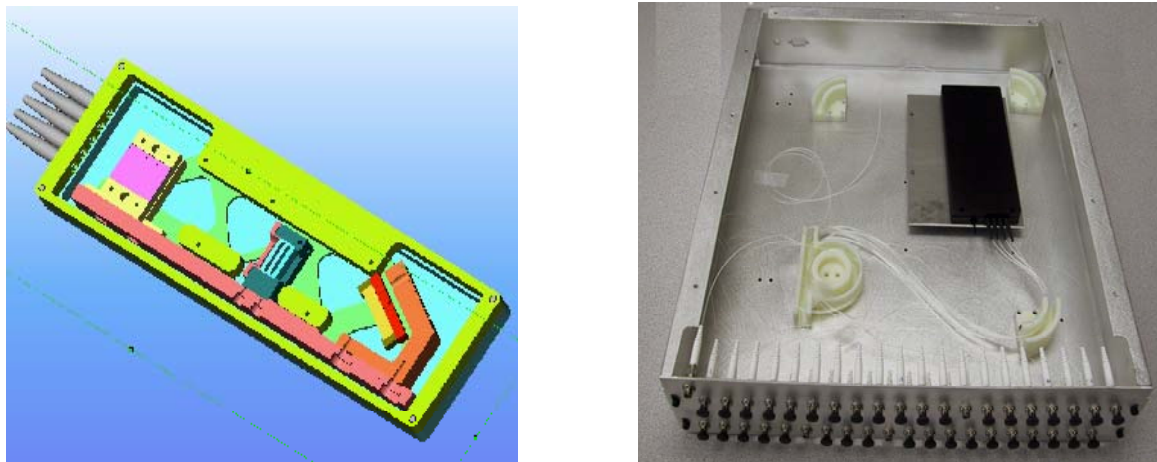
Solid model assembly drawing(left) and a packaged WDDM module (right).
